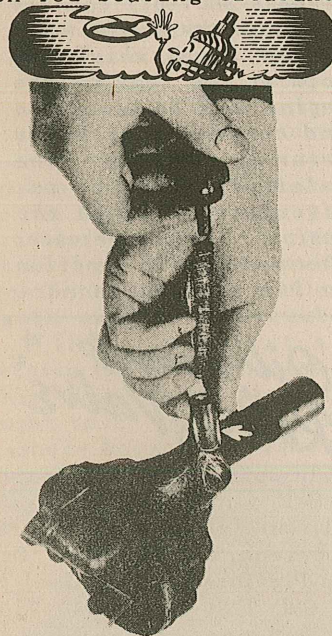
Plug up the hole in the little slug (oil pump relief valve) or requisition a new one.
